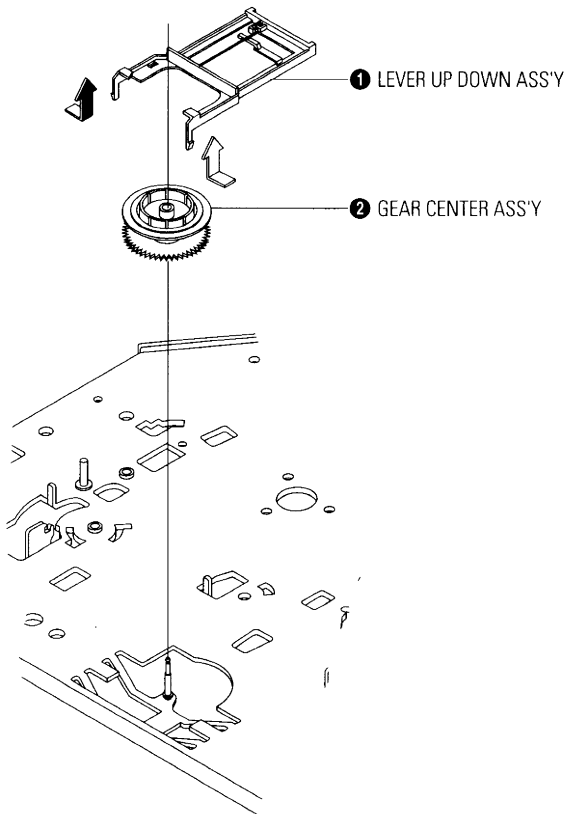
Lever Up Down Ass'y, Gear Center Ass'y Removal
